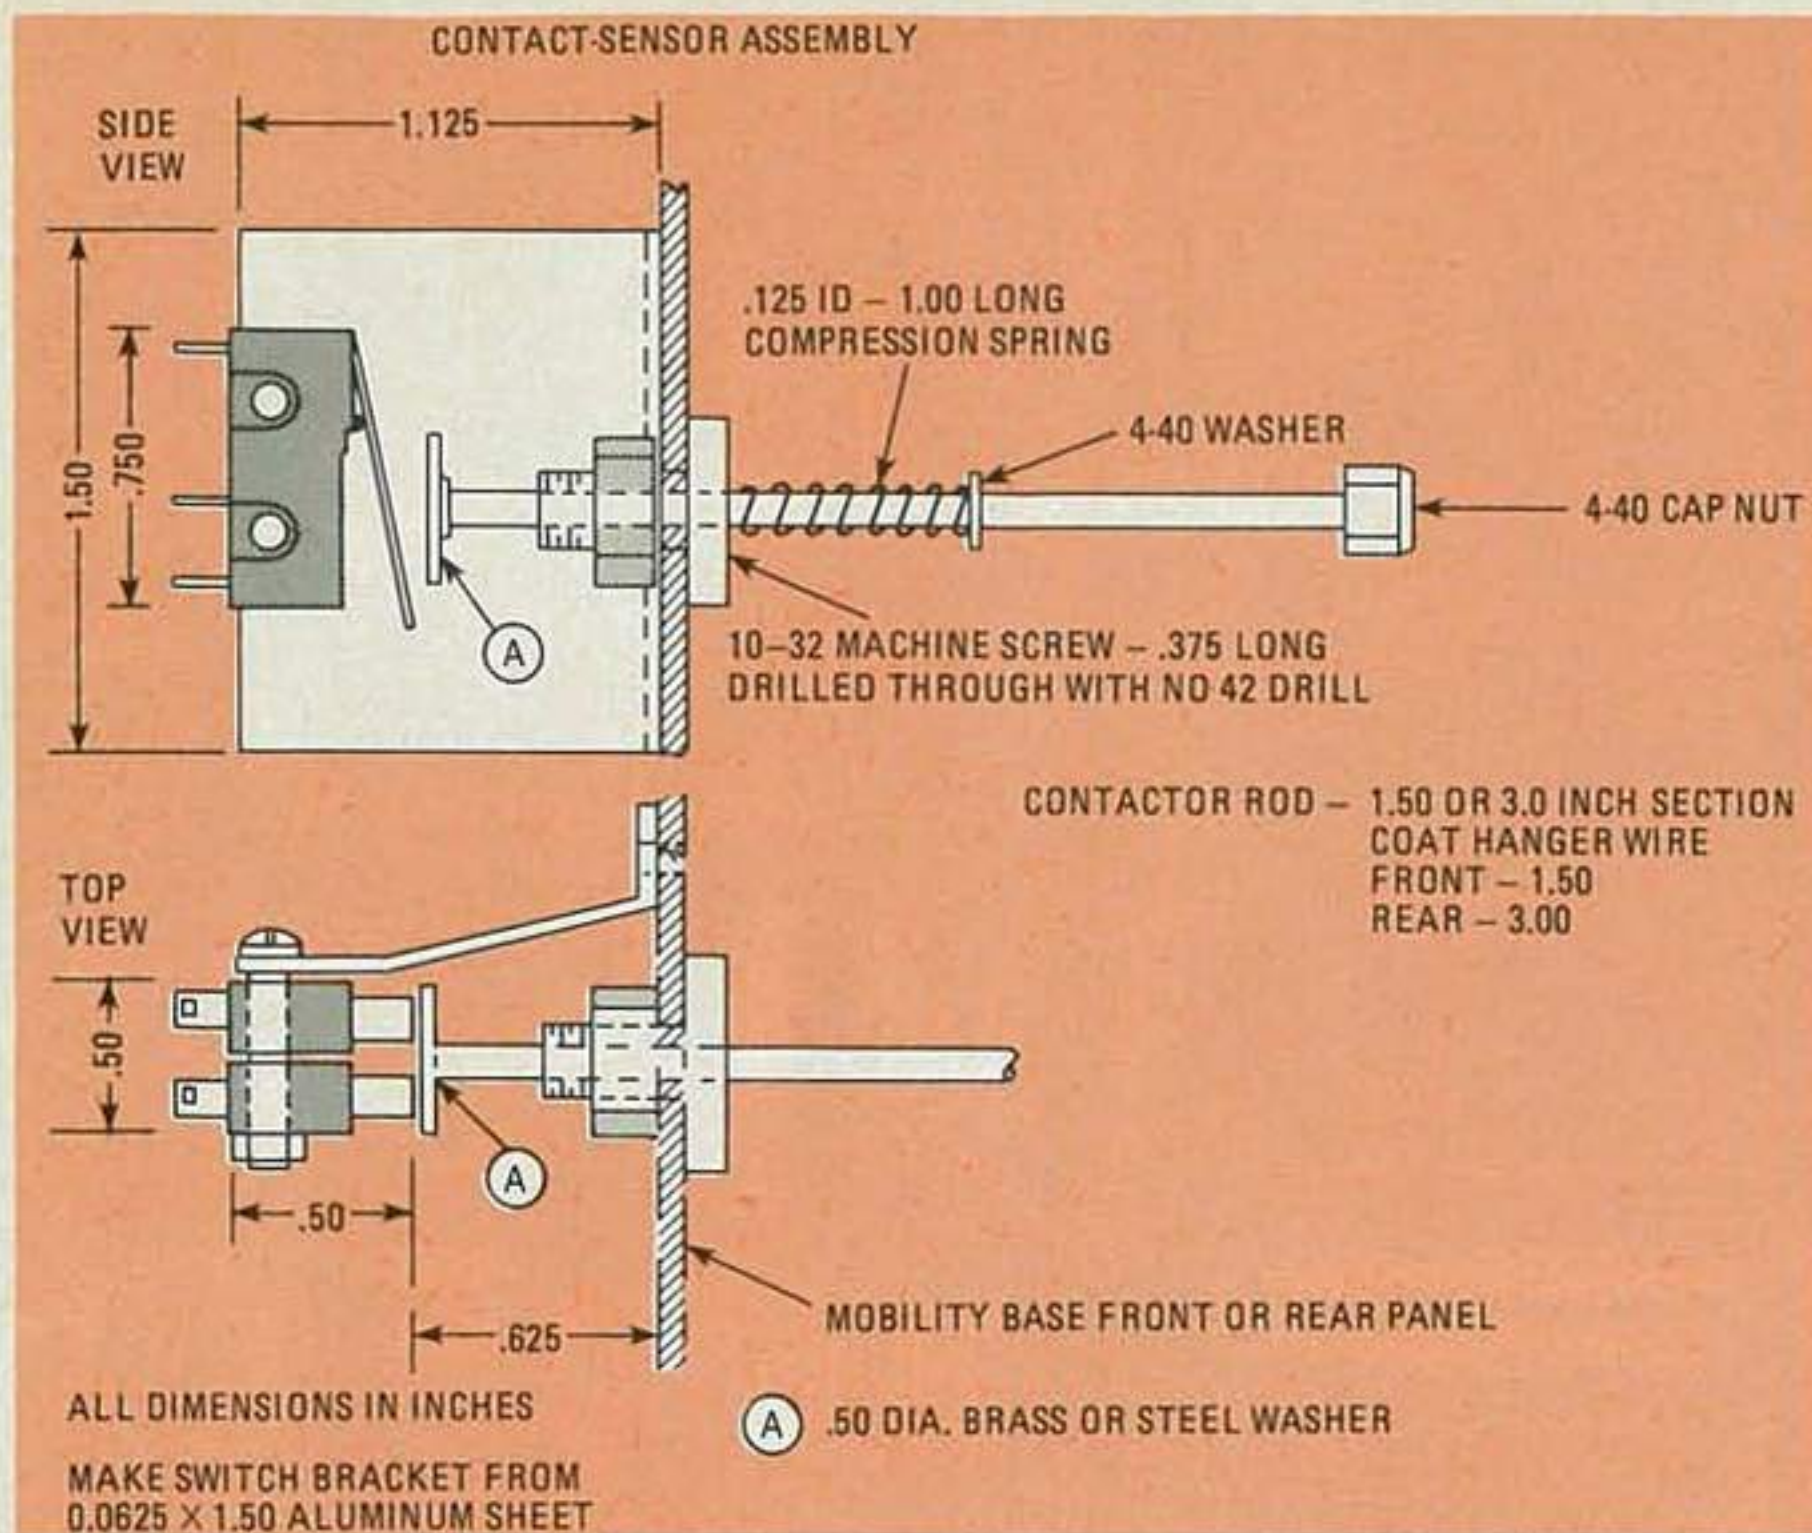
CONTACT SENSOR tells the robot when it has bumped into something. Cap nut at end of rod should be provided with cushioning material (see text).
